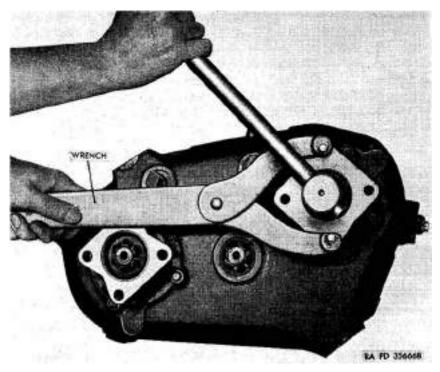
Holding companion flange with wrench-41-W-1277-40.
